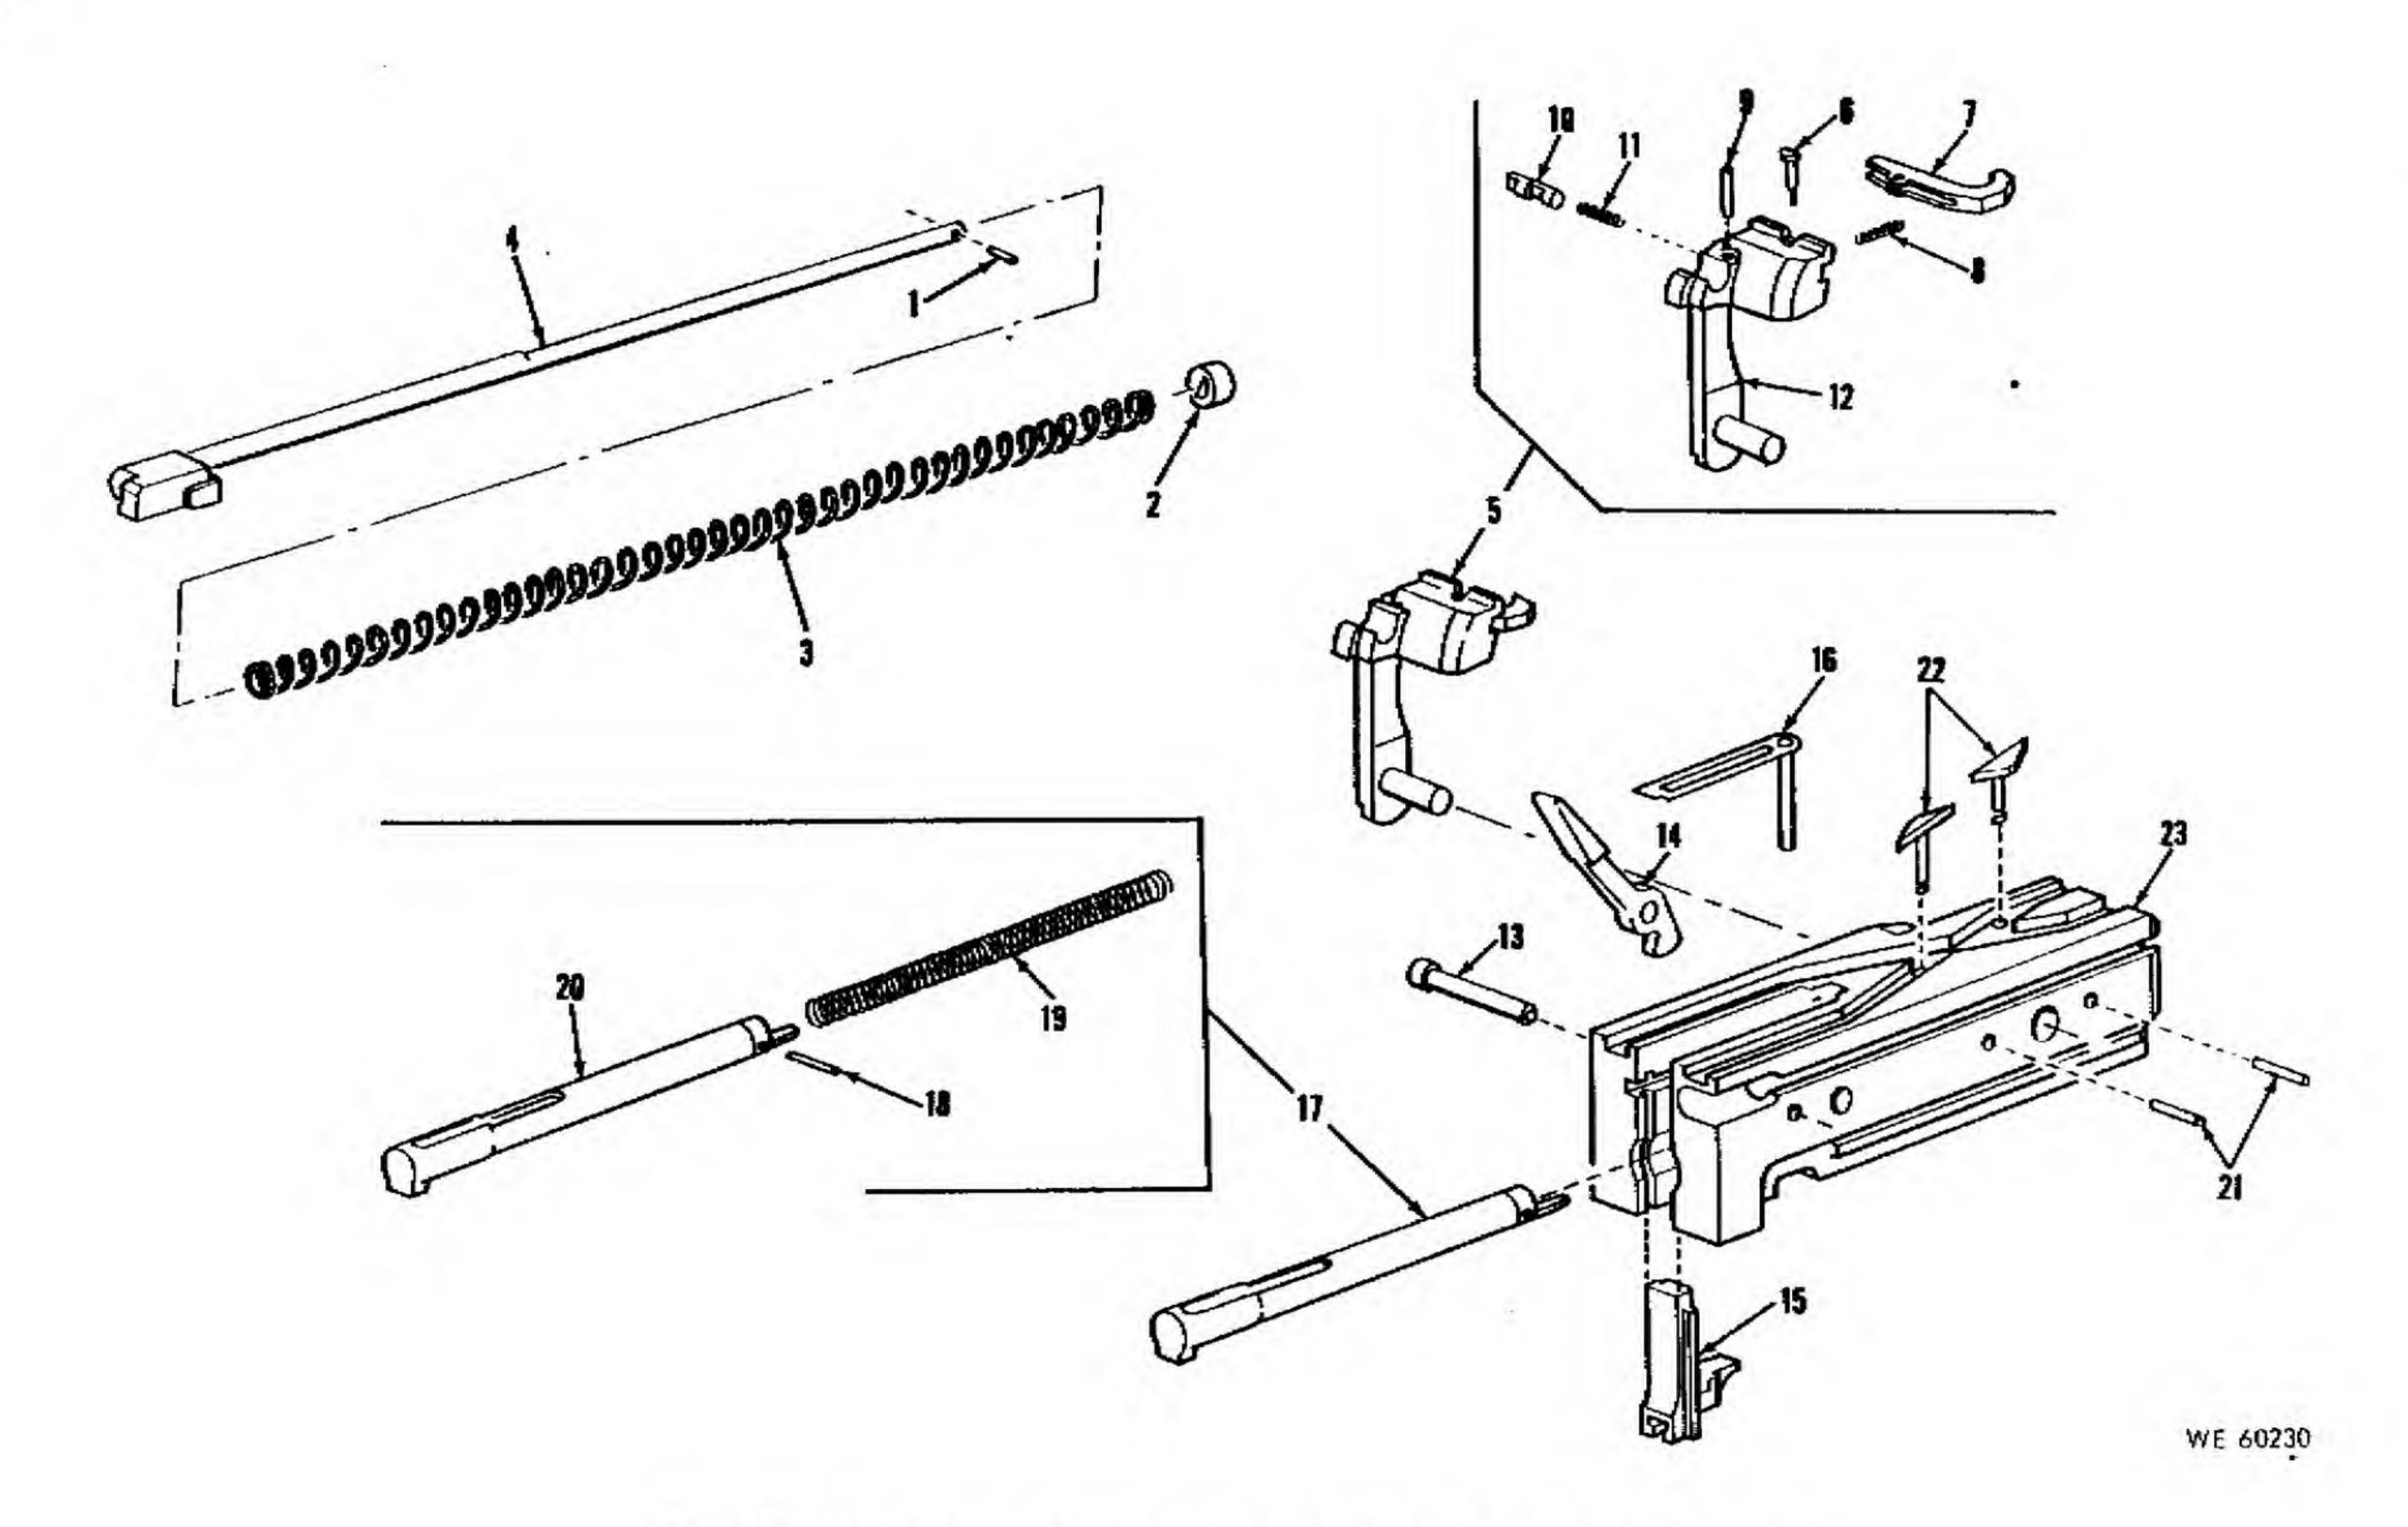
Driving spring assembly and bolt group for Caliber 30 Machine Gun,
